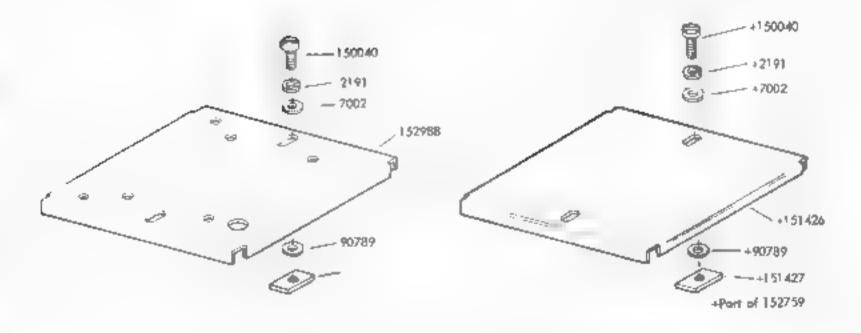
BLANK PLATE ASSEMBLIES
